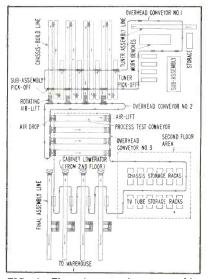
Floor layout of tv assembly lines and overhead conveyors
